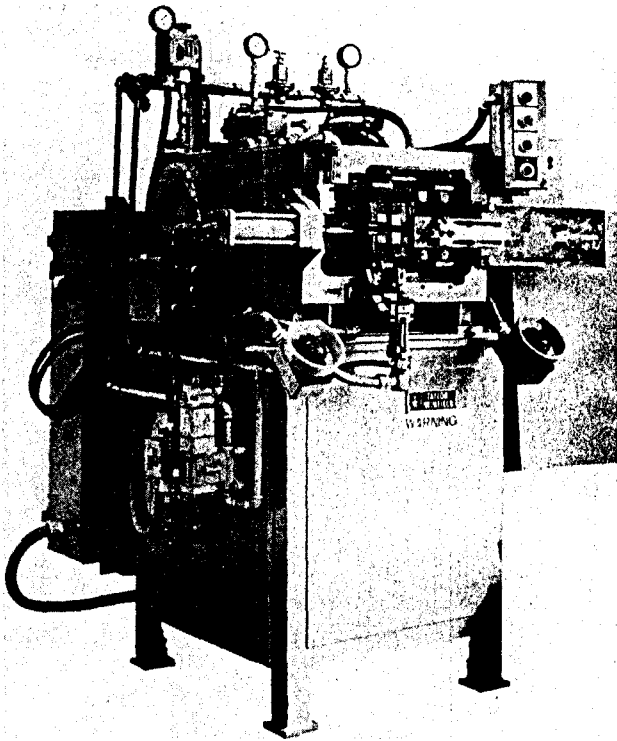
An Air-Operated Automatic Upset Welding Machine
